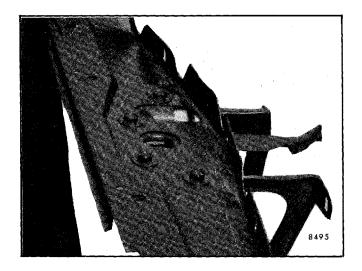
Hood Latch Assembly - H-07,27 Styles
